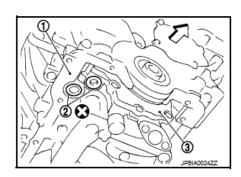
Identifying Cylinder Block And Oil Pump O-Rings Courtesy of NISSAN NORTH AMERICA, INC.
